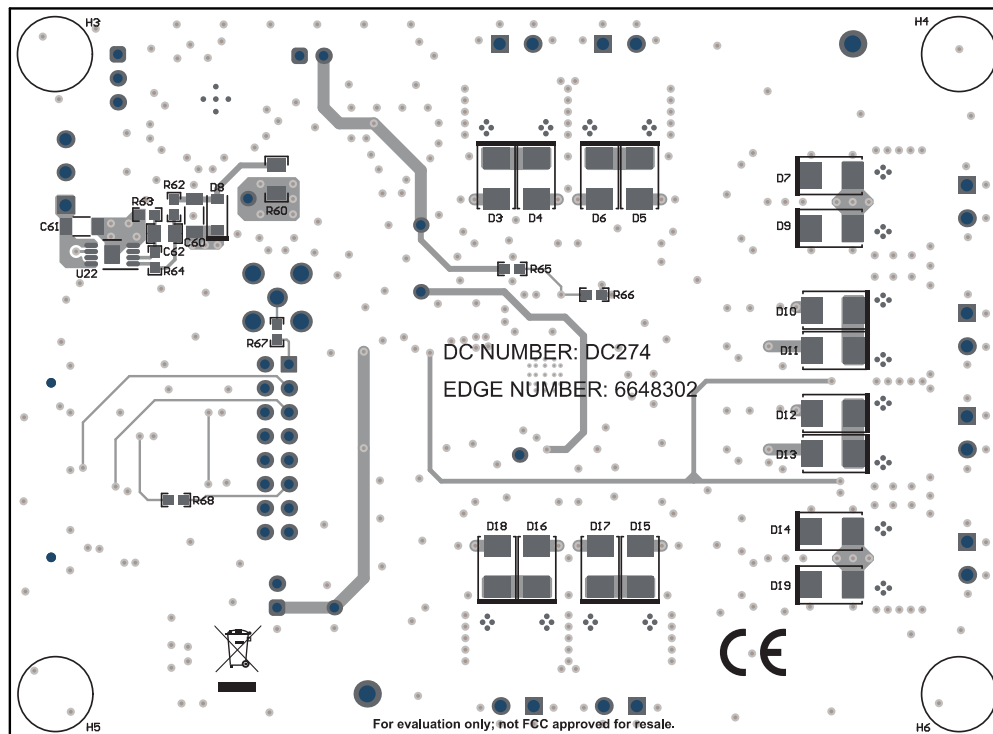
ADS125H18 EVM PCB Layout - Bottom Layer
